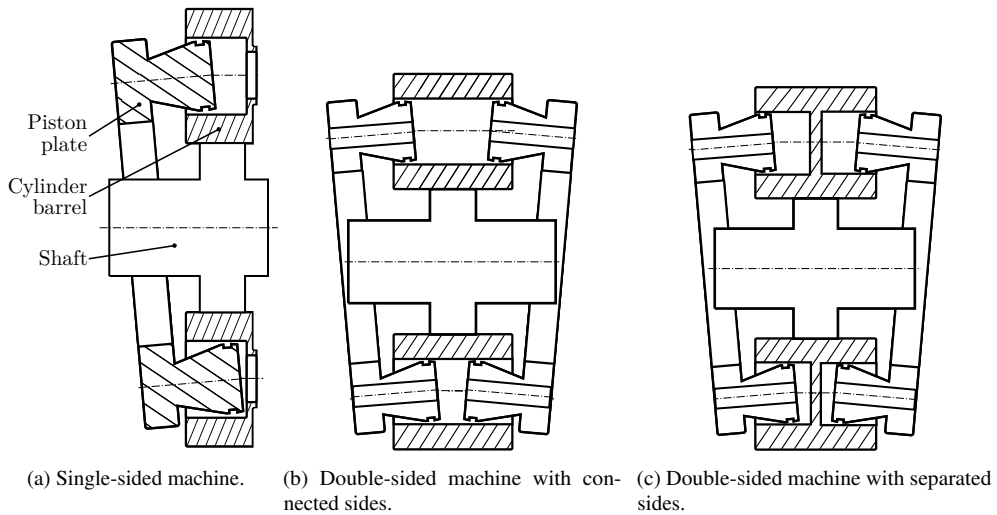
Schematic of different floating piston machine versions [10, 13].
